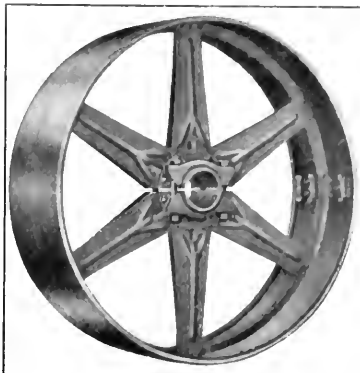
"American" All-steel Split Pulley—Arms Riveted to Hub Flange
